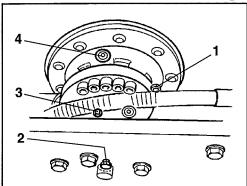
Torque hub 1 Level plug 2 Level plug 3 Filler plug 4 Filler plug
